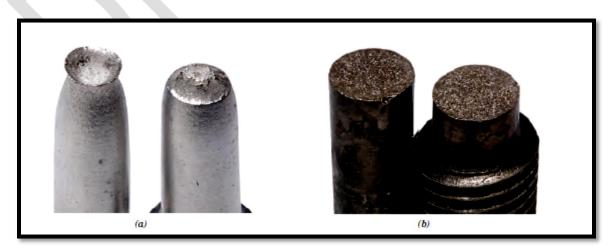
(a) Cup-and-cone fracture in aluminum. (b) Brittle fracture in a mild steel.
